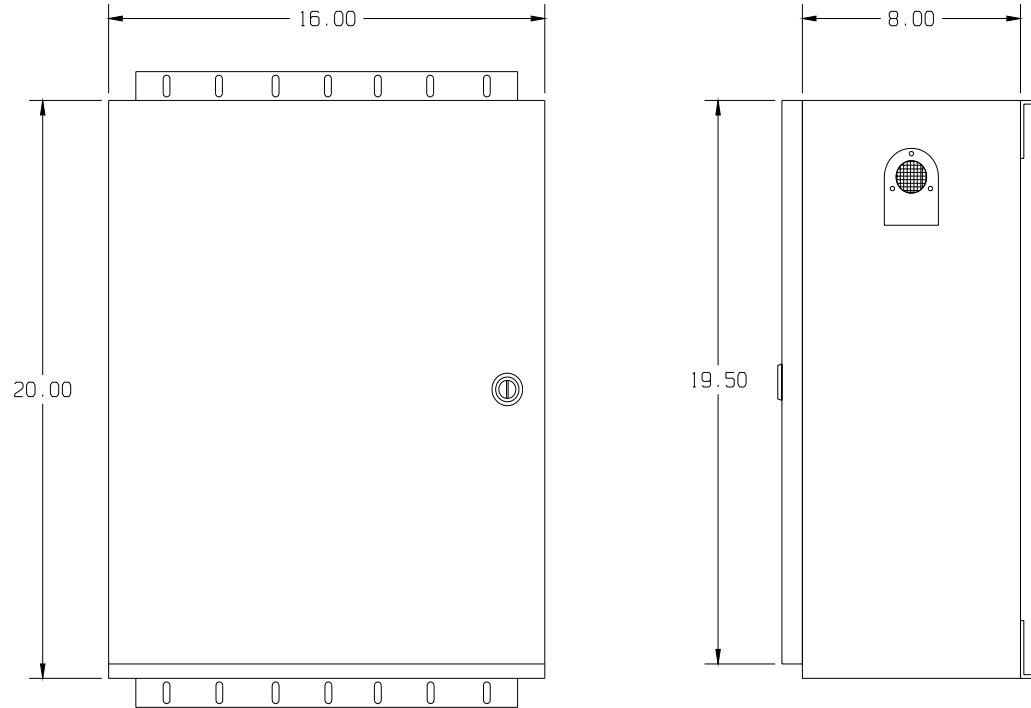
PF Live Plus Cabinet Mounting Dimensions
